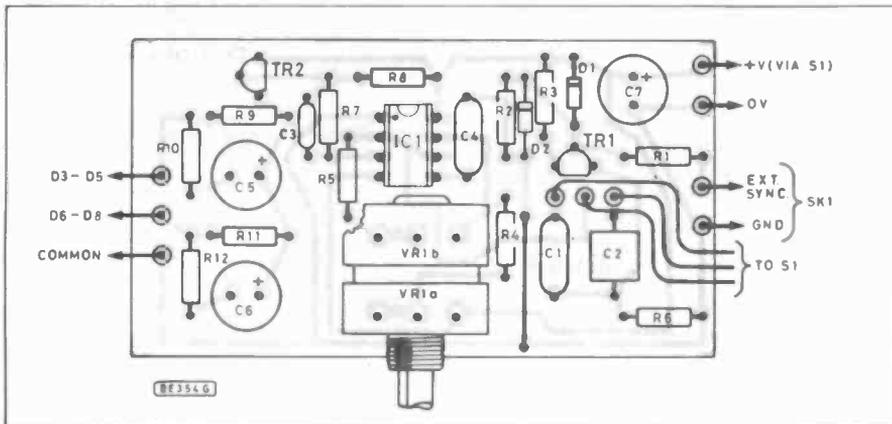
Component layout on the printed circuit board. The integrated circuit IC1 should be mounted on the board via an i.c. socket.
